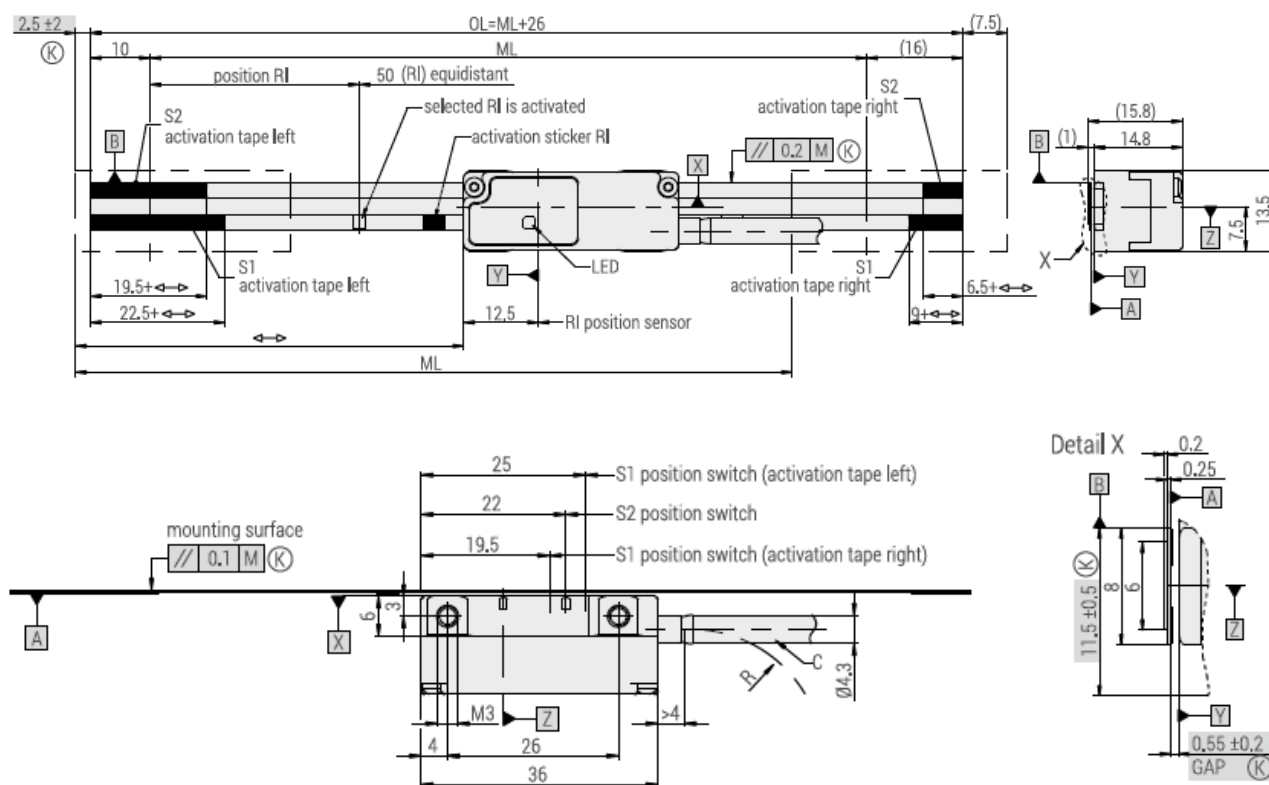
Dimensional drawing of MS15 series linear encoder
